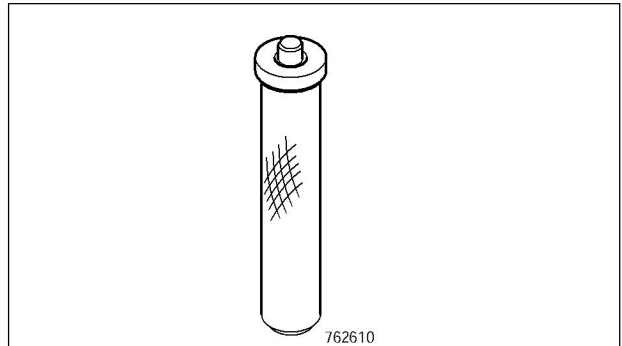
892/01159 Rocker Cover Injector Seals Fitting Tool
